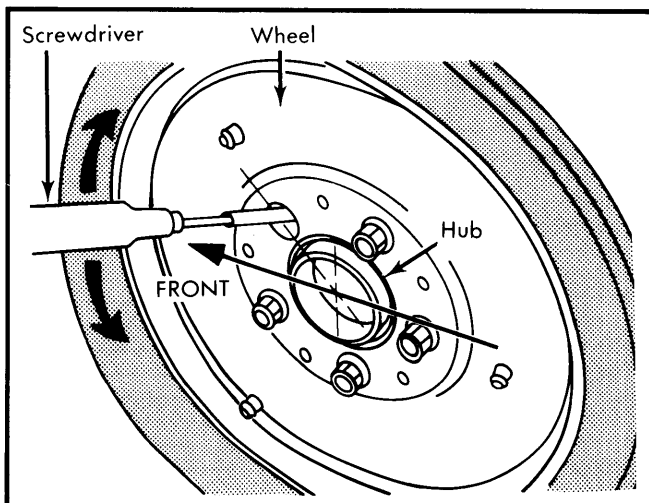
Fitting Parking Brake Adjuster Tool Into Adjusting Mechanism
